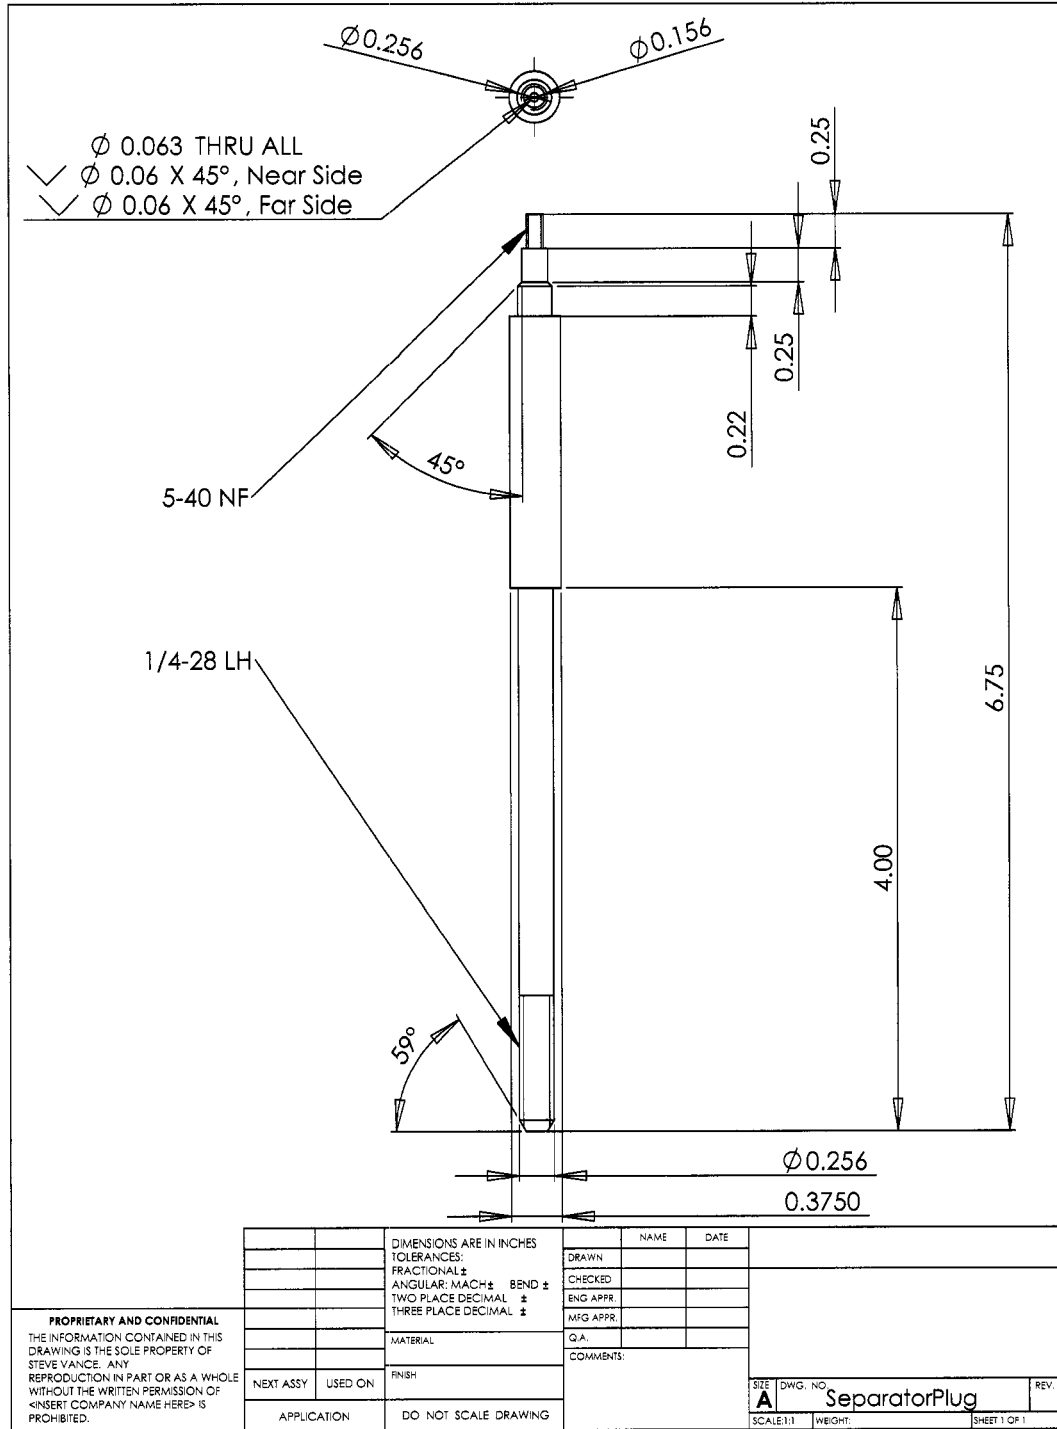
Detail of separator connector tube. Modified from Harwood drawing number B11729.
